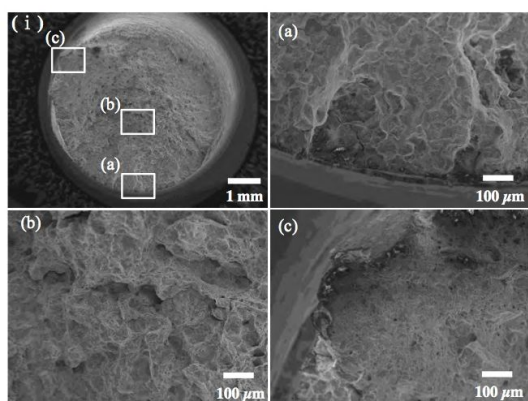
SEM images of the fractured specimen in CF; (a) crack initiation, (b) dimple pattern and (c) ductile fracture surface.
